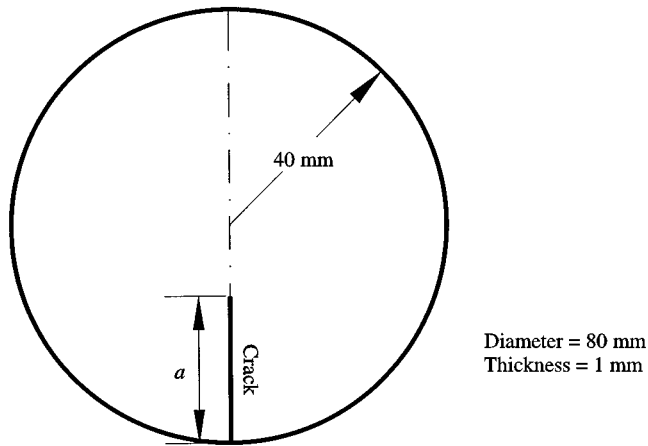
Geometric dimension and configuration of the cracked circular plate.
